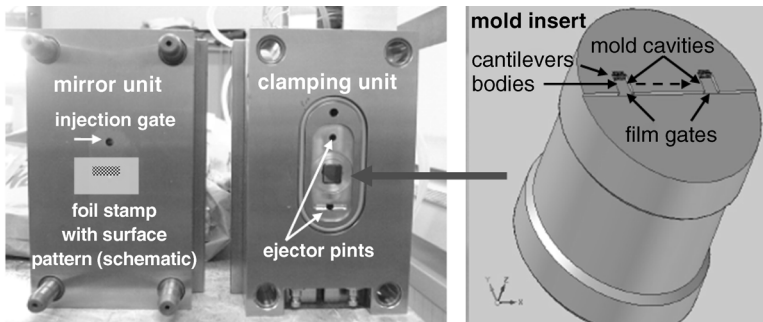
Molding tools for injection molding, left side: while the clamping unit contains the mold insert with two mold cavities and channels, right side on the mirror unit a foil-like stamp can be placed. By placing both units face to face in an injection-molding machine, two closed microcavities are formed, which can be filled with viscous polymer through the injection gate [50]. (Reproduced by permission. Copyright 2015, Elsevier.)
